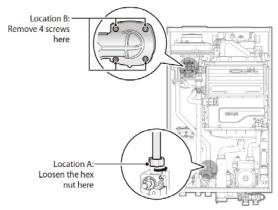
Detaching Gas Inlet Pipe from Gas Valve and Fan Motor Assembly (NCB-40LSWE)
